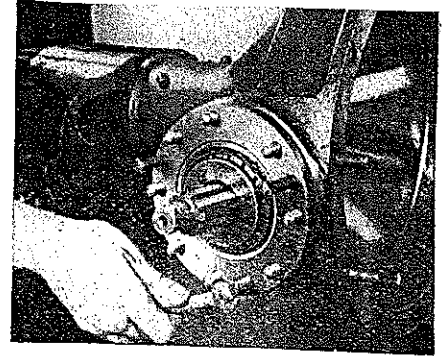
Remove pinion and cage, using puller screws in holes provided
